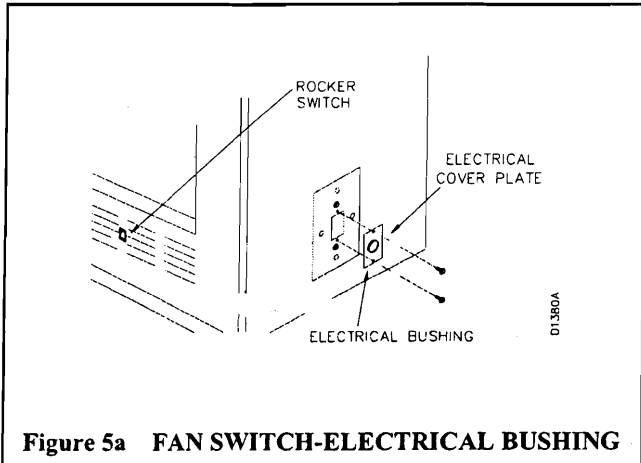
FAN SWITCH-ELECTRICAL BUSHING
